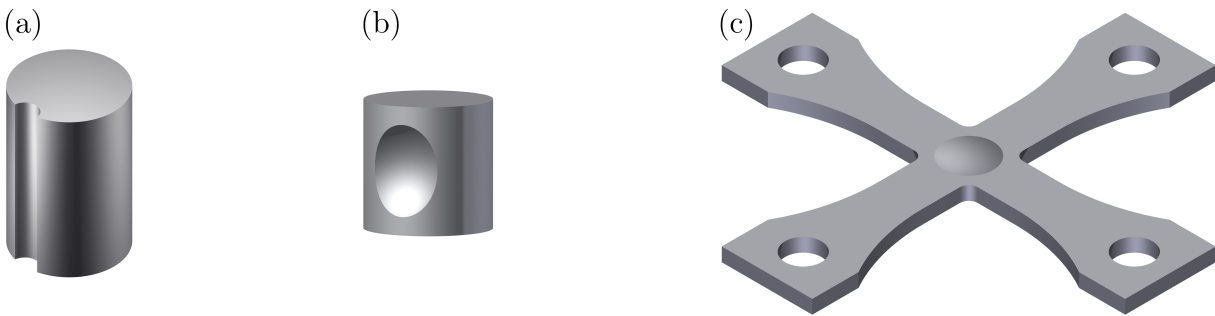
The illustration of: (a) notched cylindrical specimen [87]; (b) cylindrical specimen with a spherical recess [239]; (c) biaxially loaded cruciform specimen [218].
